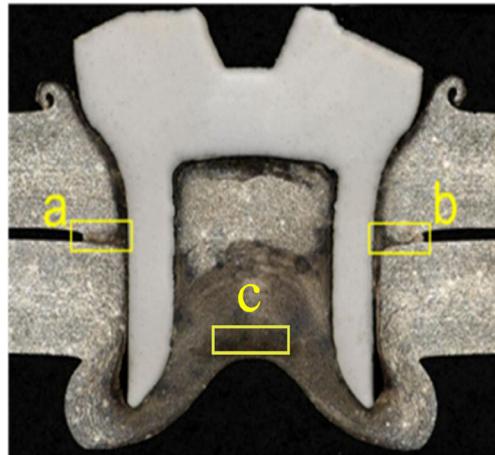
Microstructure of FSPR joint. (a), (b) Sheet-sheet interface outside the rivet. (c) Fine grains inside the rivet cavity [106]
